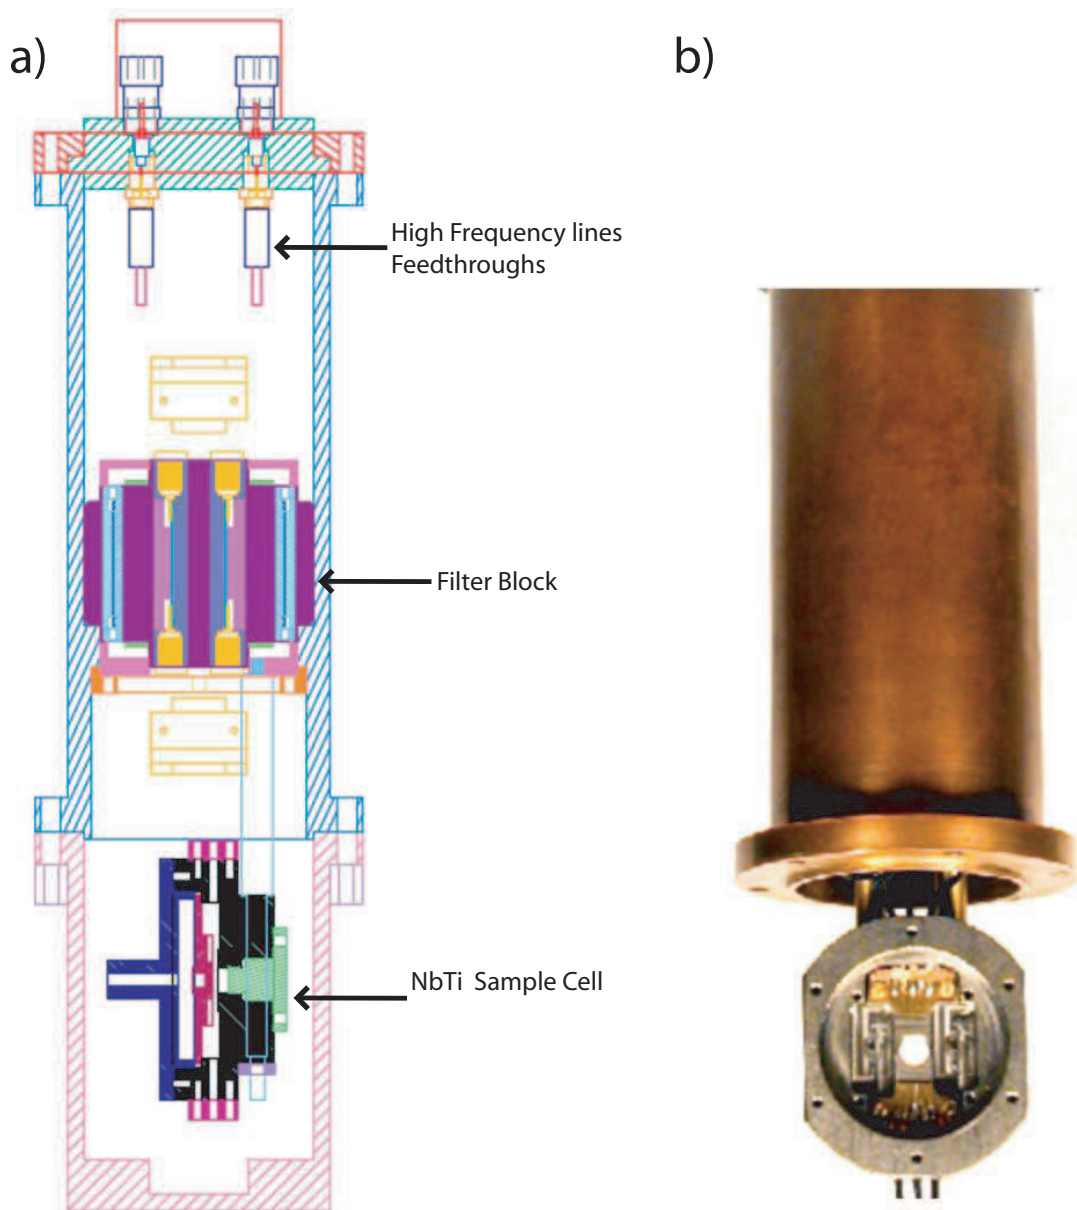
a) Drawing of a cross-sectional view of the assembled outer sample can and NbTi sample cell. b) a picture of the sample can with the bottom opened and part of the NbTi cell mounted
